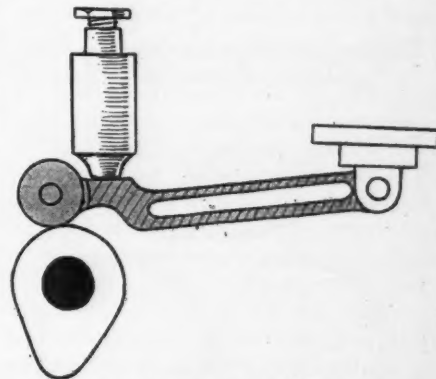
SHEFFIELD-SIMPLEX CAM GEARS
